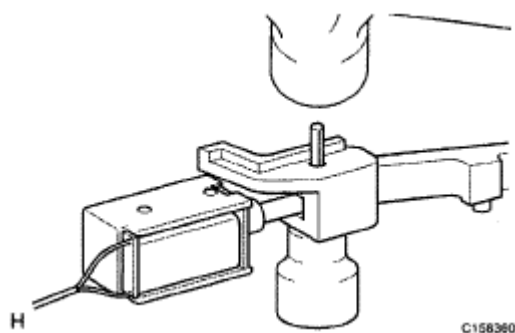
Tapping In Spring Pin To Connecting Shift Lock Plate And Shift Lock Solenoid
